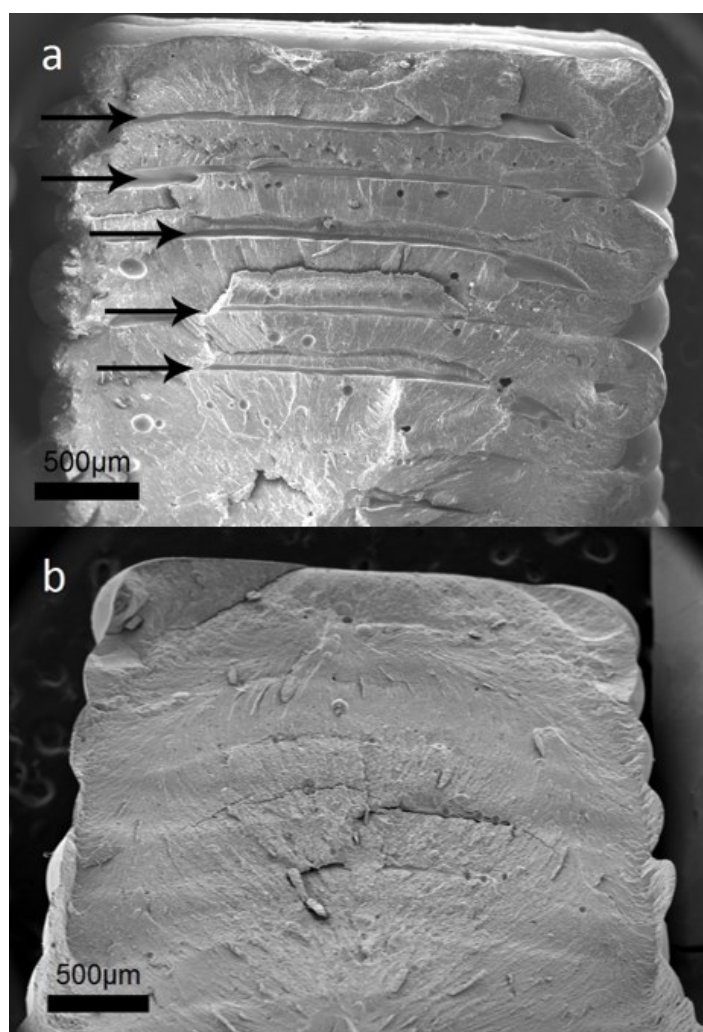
Fracture surface of a green body test bar printed in the widthwise orientation, in oil (a) and air (b). Long inter-filament printing defects are indicated in the part printed in oil. Some drying cracks and sagging are present in b due to excessively fast drying.
